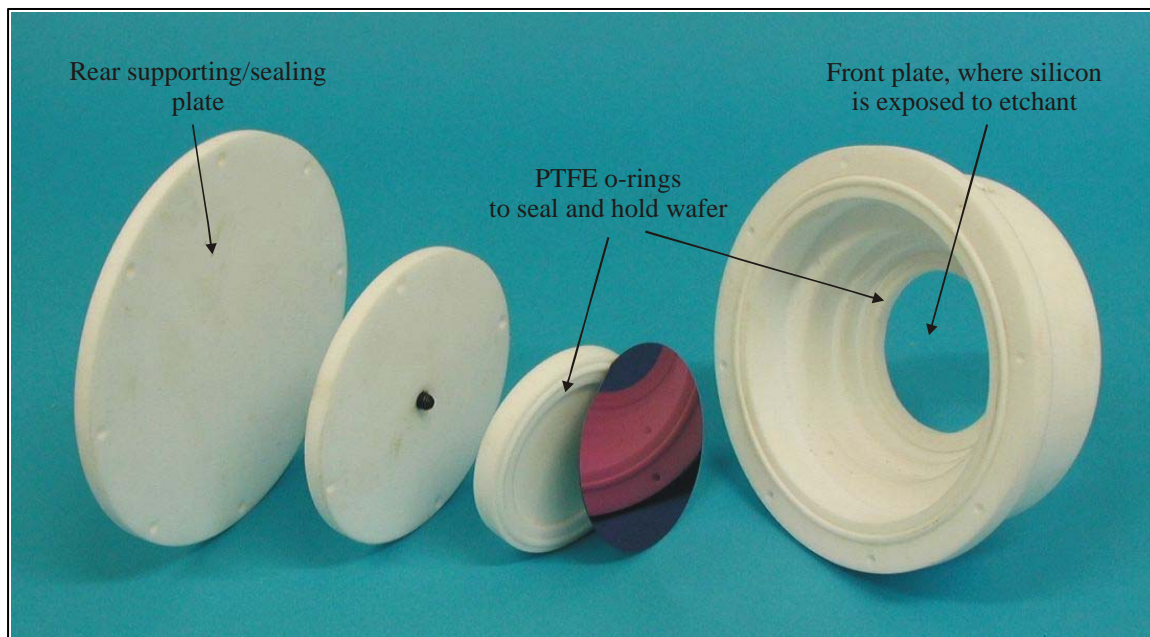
A photograph of the etching jig used for the SUMC devices
